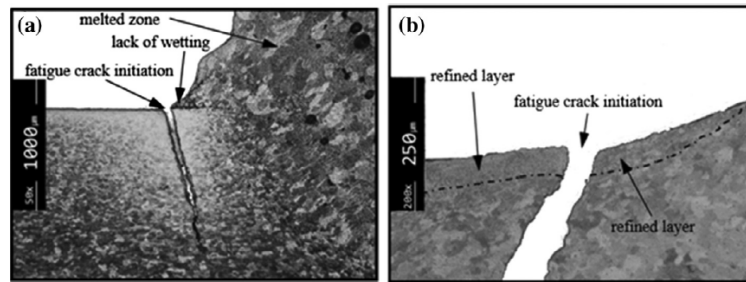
Crack initiation sites: (a) GMAW weld toe and (b) Post-processed notch root.
